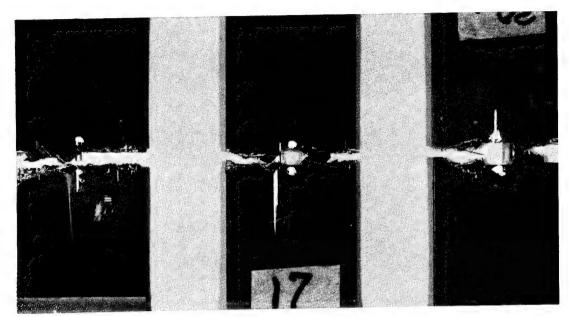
Laminate L1 Test Specimens Containing a Full-Penetration Hole
